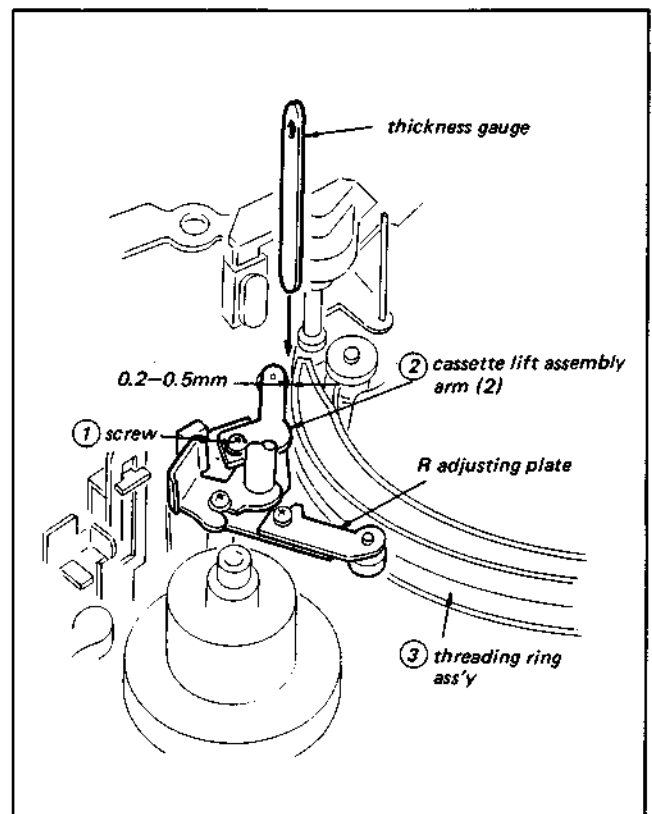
Clearance adjustment of cassette lift assembly arm
